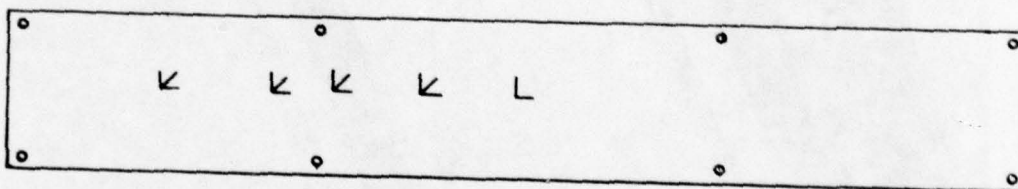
BOX BEAM SUBCOMPONENT ASSEMBLY
